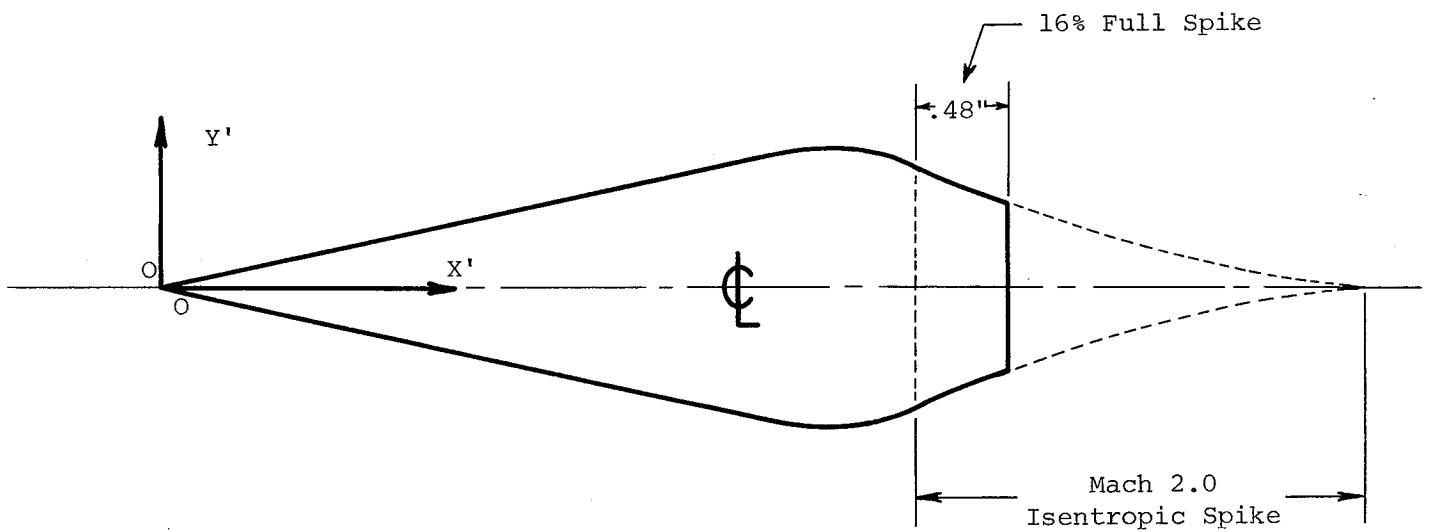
Plan View of Planar Truncated Plug Nozzle Test Section.
